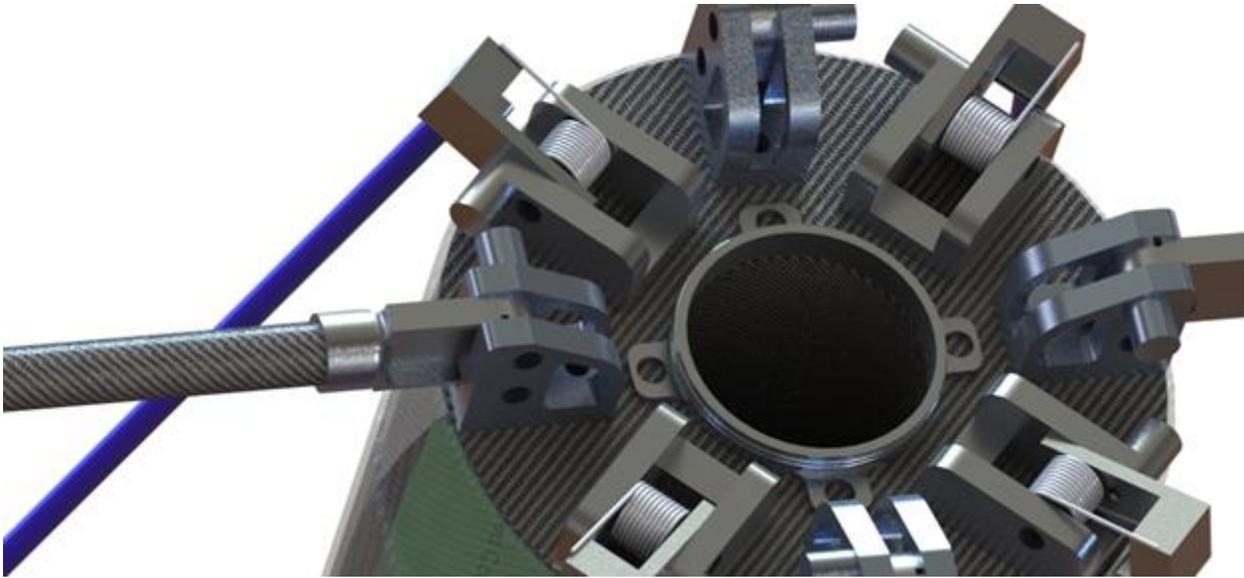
rendering of torque flange installed on the top bulk plate of the payload
